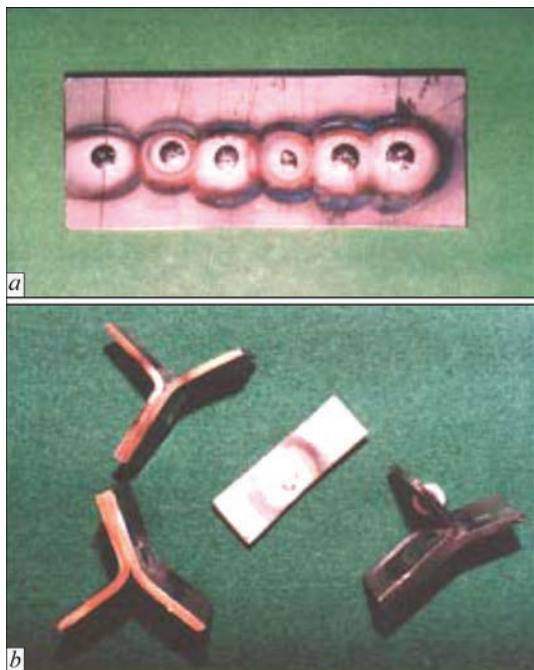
Appearance of spot overlapped welded joints from VT-20 alloy of $\delta = 2 + 2$ mm thick: back side of the joint (weld root) (a); specimens after bending test (b)
